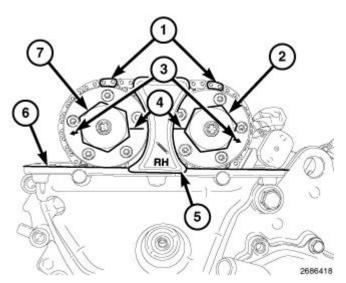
Phaser Timing Marks, Oil Control Valves & RH Camshaft Phaser Lock
